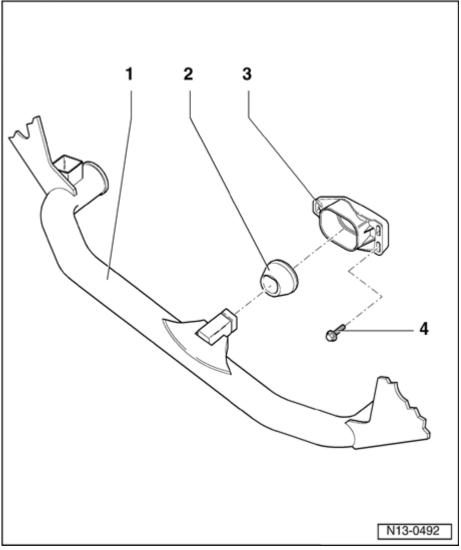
Front Engine Mount Courtesy of VOLKSWAGEN UNITED STATES, INC.
